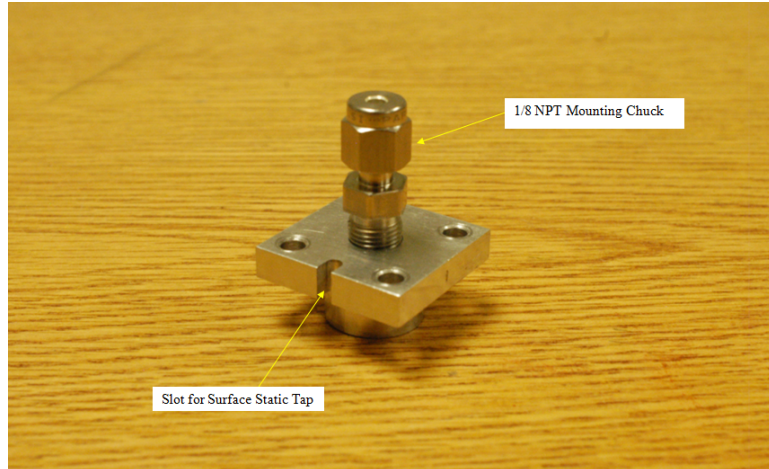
Probe Plug with Slot and 1/8 NPT Mounting Chuck
